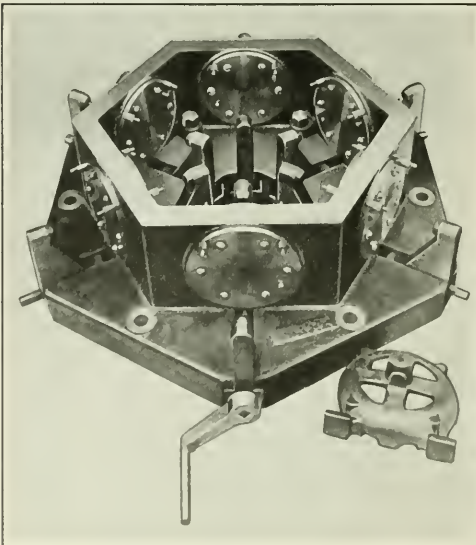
Fixture for holding Motor Guards while machining the Feet
